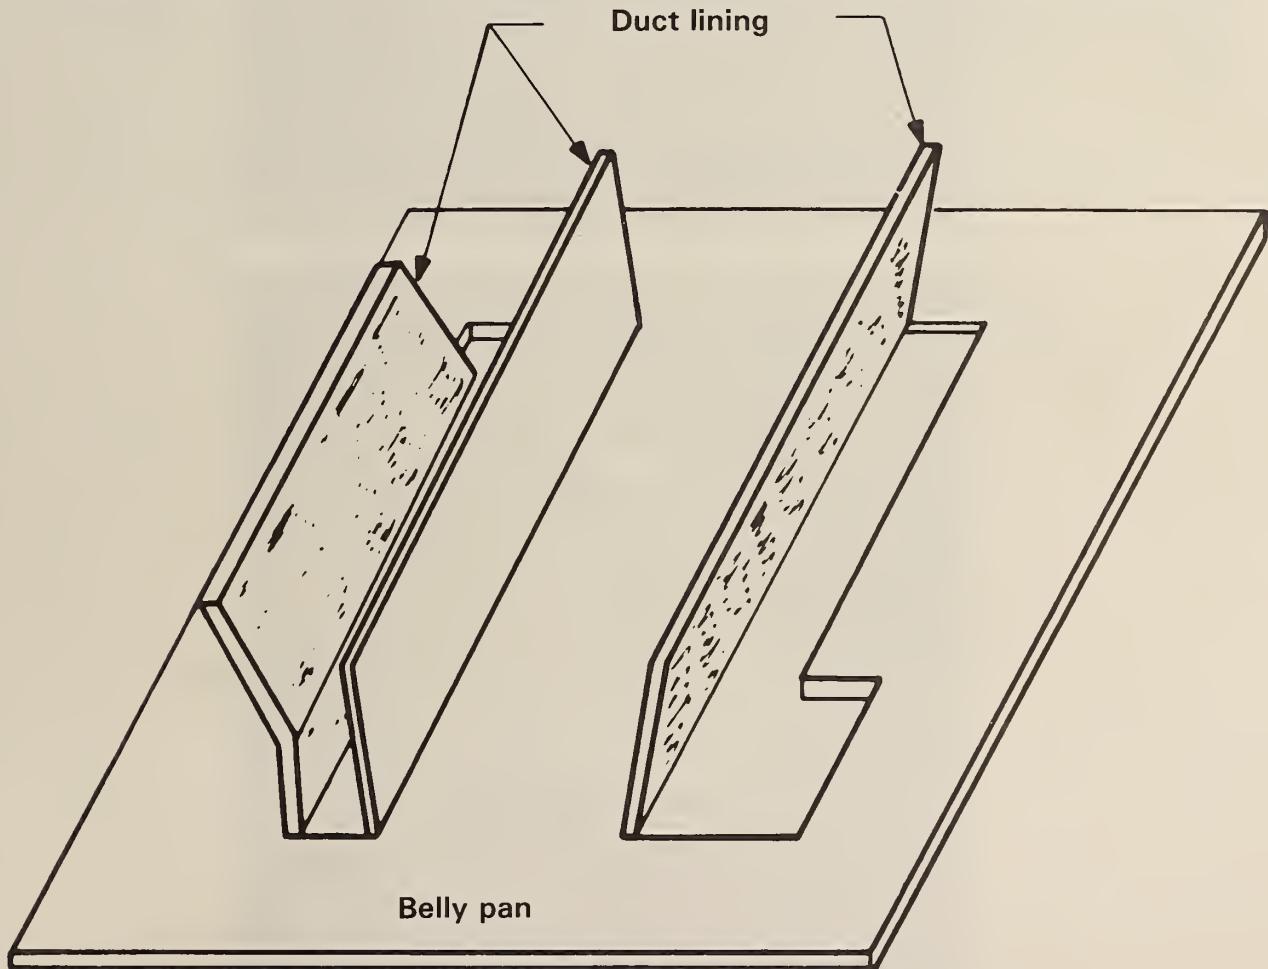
Belly pan with cooling fan exhaust duct lining.
